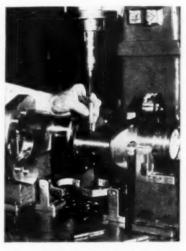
Gaging the final diameter of the "Spot". Constant checking maintains precision at all points.
